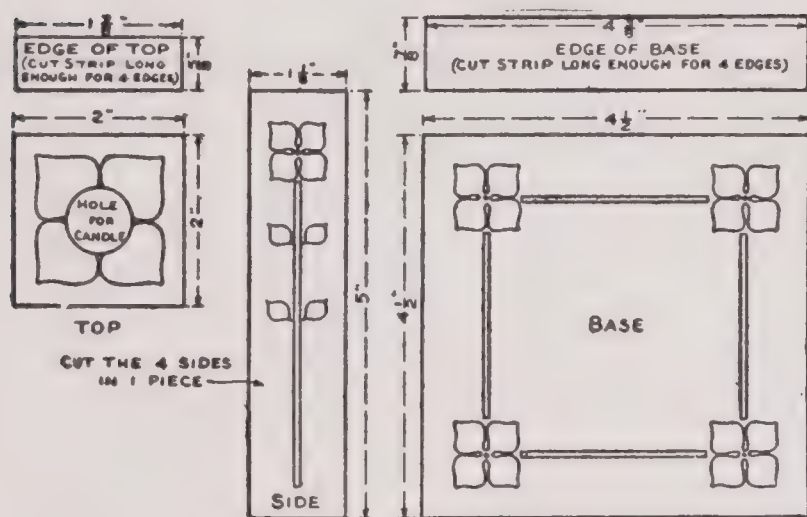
Patterns for Brass Pieces of the Candle-stick.
